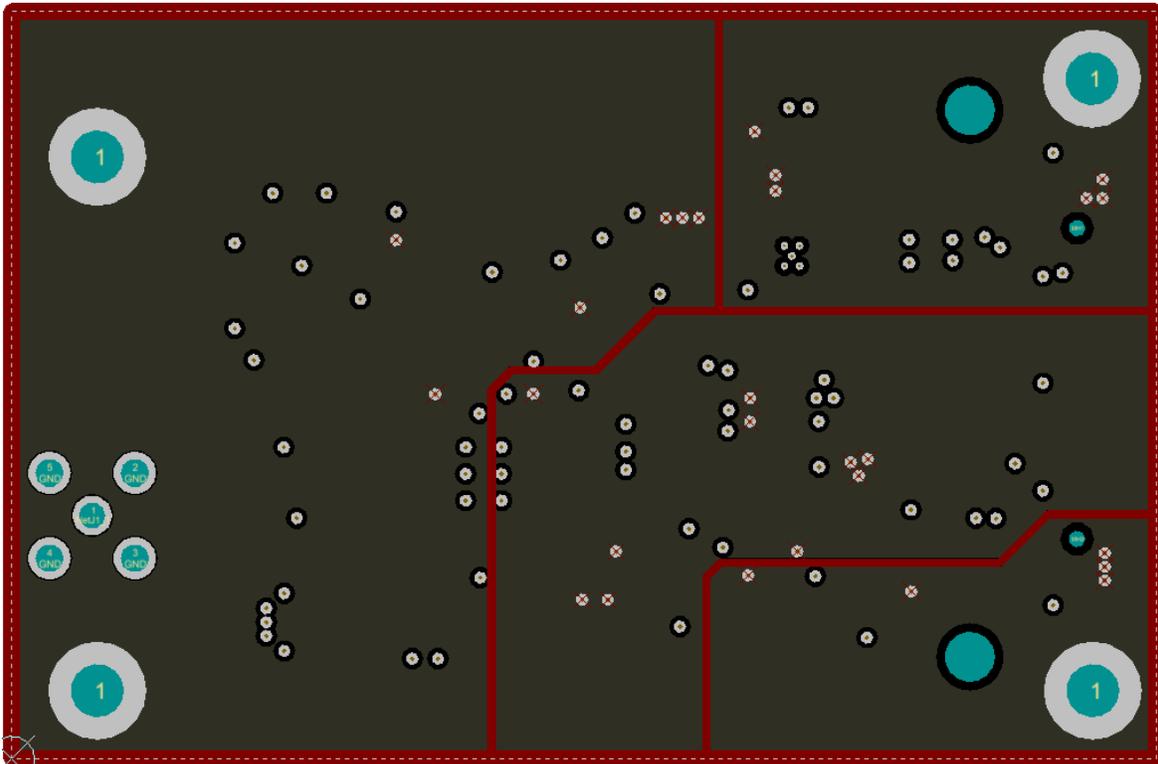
ADS8681EVM PCB Layer 3 – Power Planes
